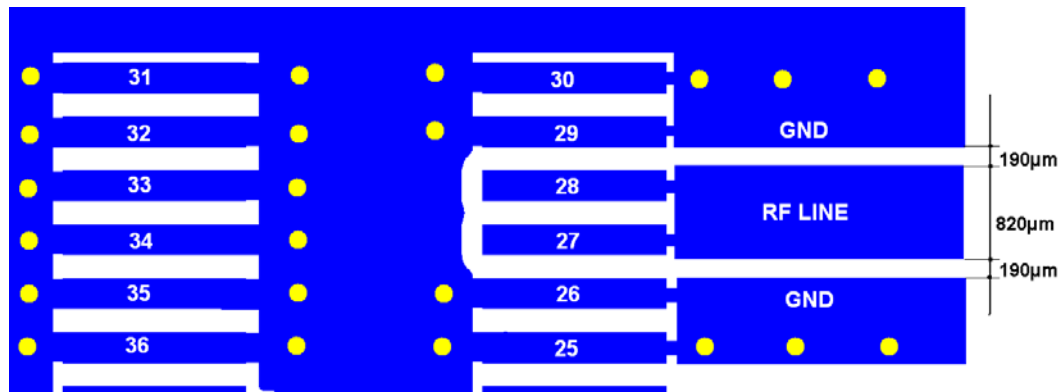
RF-Line PCB routing example for 1.5mm FR4
